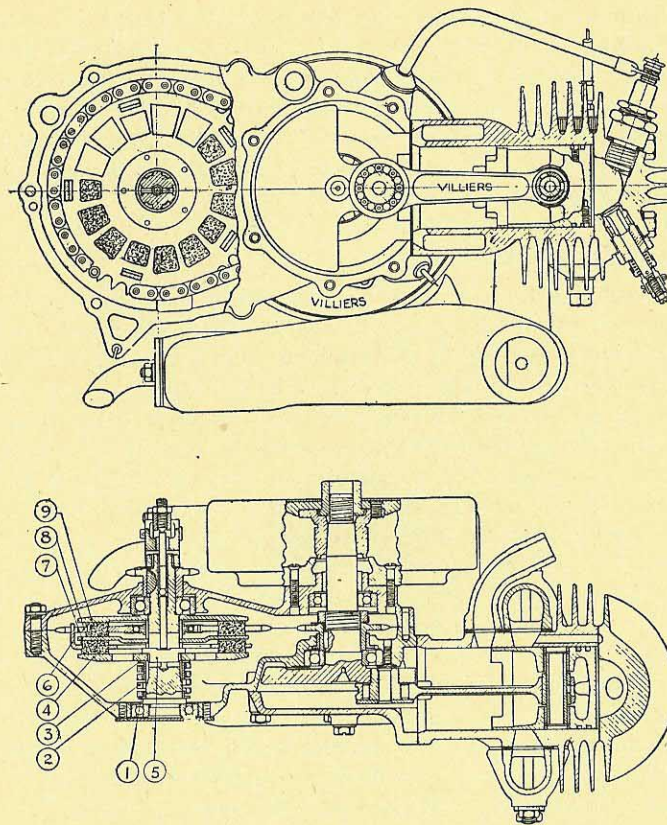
SECTIONAL ARRANGEMENTS OF JUNIOR-DE-LUXE AUTOCYCLE ENGINE.
